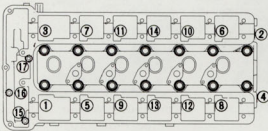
Cylinder Head Y5191 Bolts Removal
